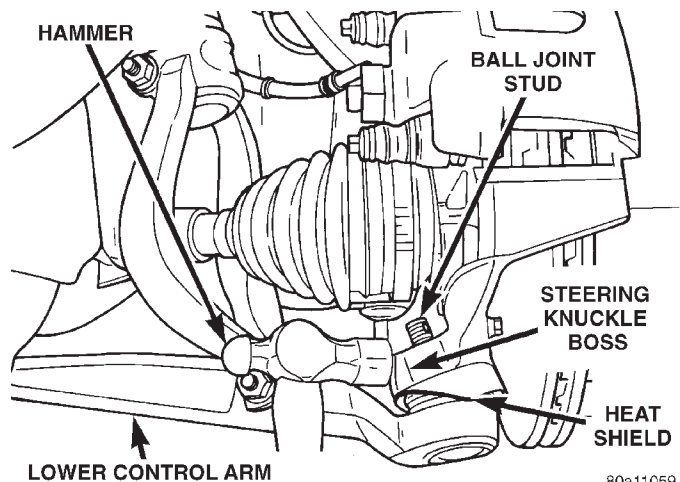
Separating Ball Joint Stud From Steering Knuckle
